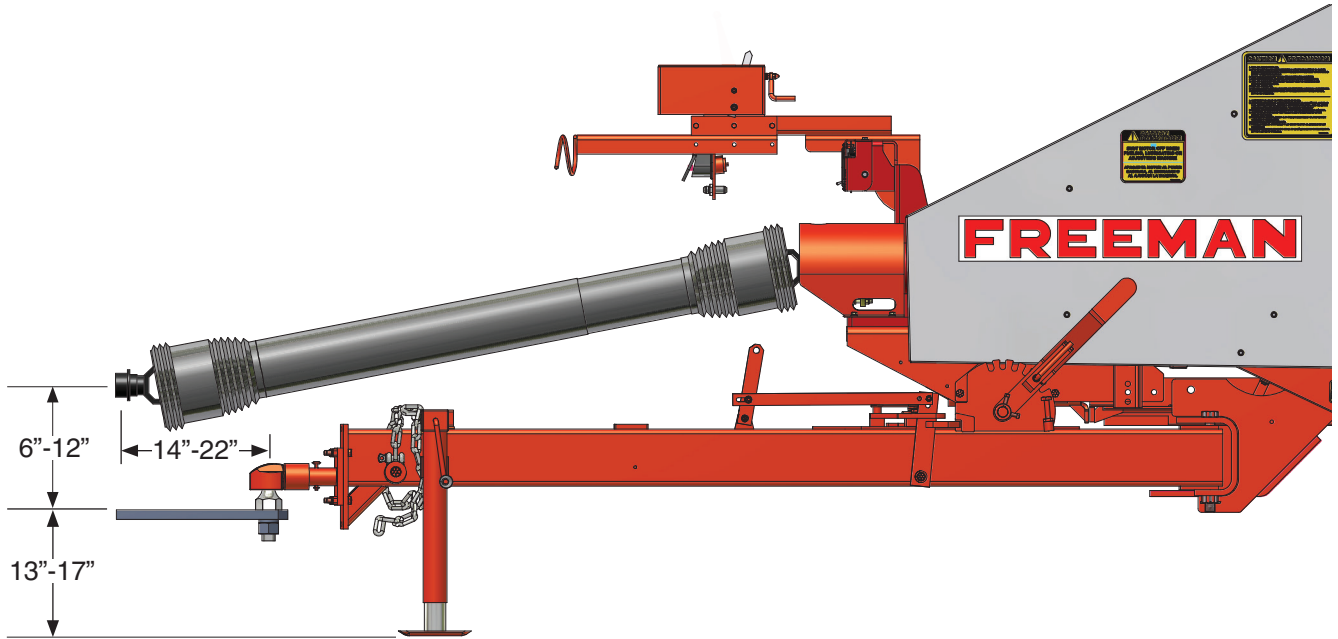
Driveline Attaching Measurements, One Piece Driveline.
